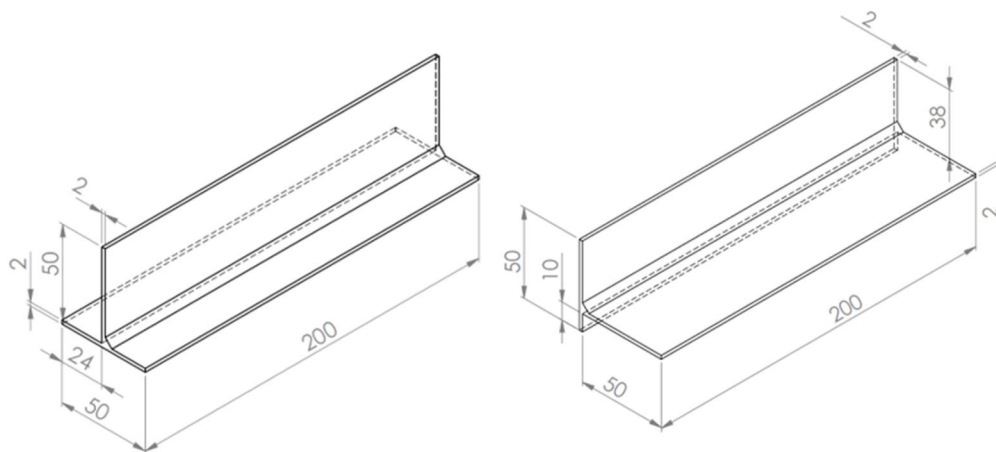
Geometry of weldments; variant A, variant B
